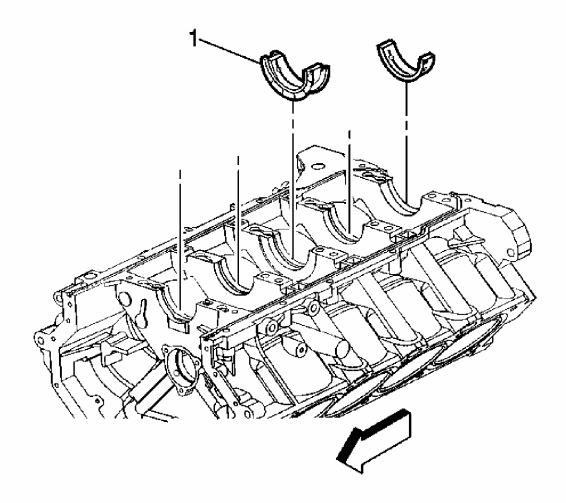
View Of Thrust Bearing Courtesy of GENERAL MOTORS CORP.
